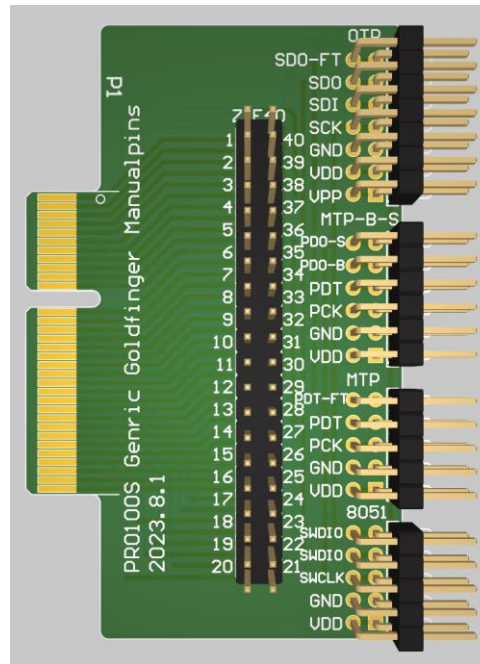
Universal Burn-in Adapter Board (Manual Wiring Version)
